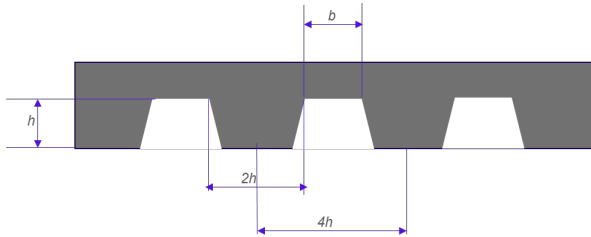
Dimensioned cross section of the silicon microchannel cold plate showing trapezoidal channel geometry, channel width, height, wall thickness, and pitch.
